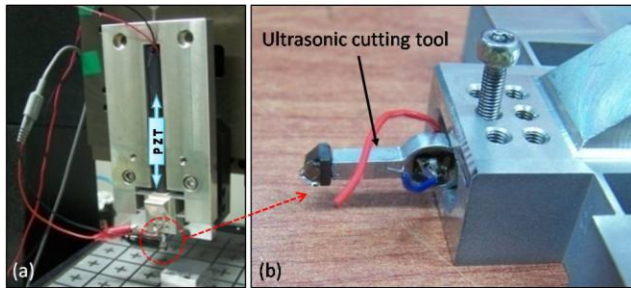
Photograph of (a) FTS prototype assembly, (b) Ultrasonic vibration tool
